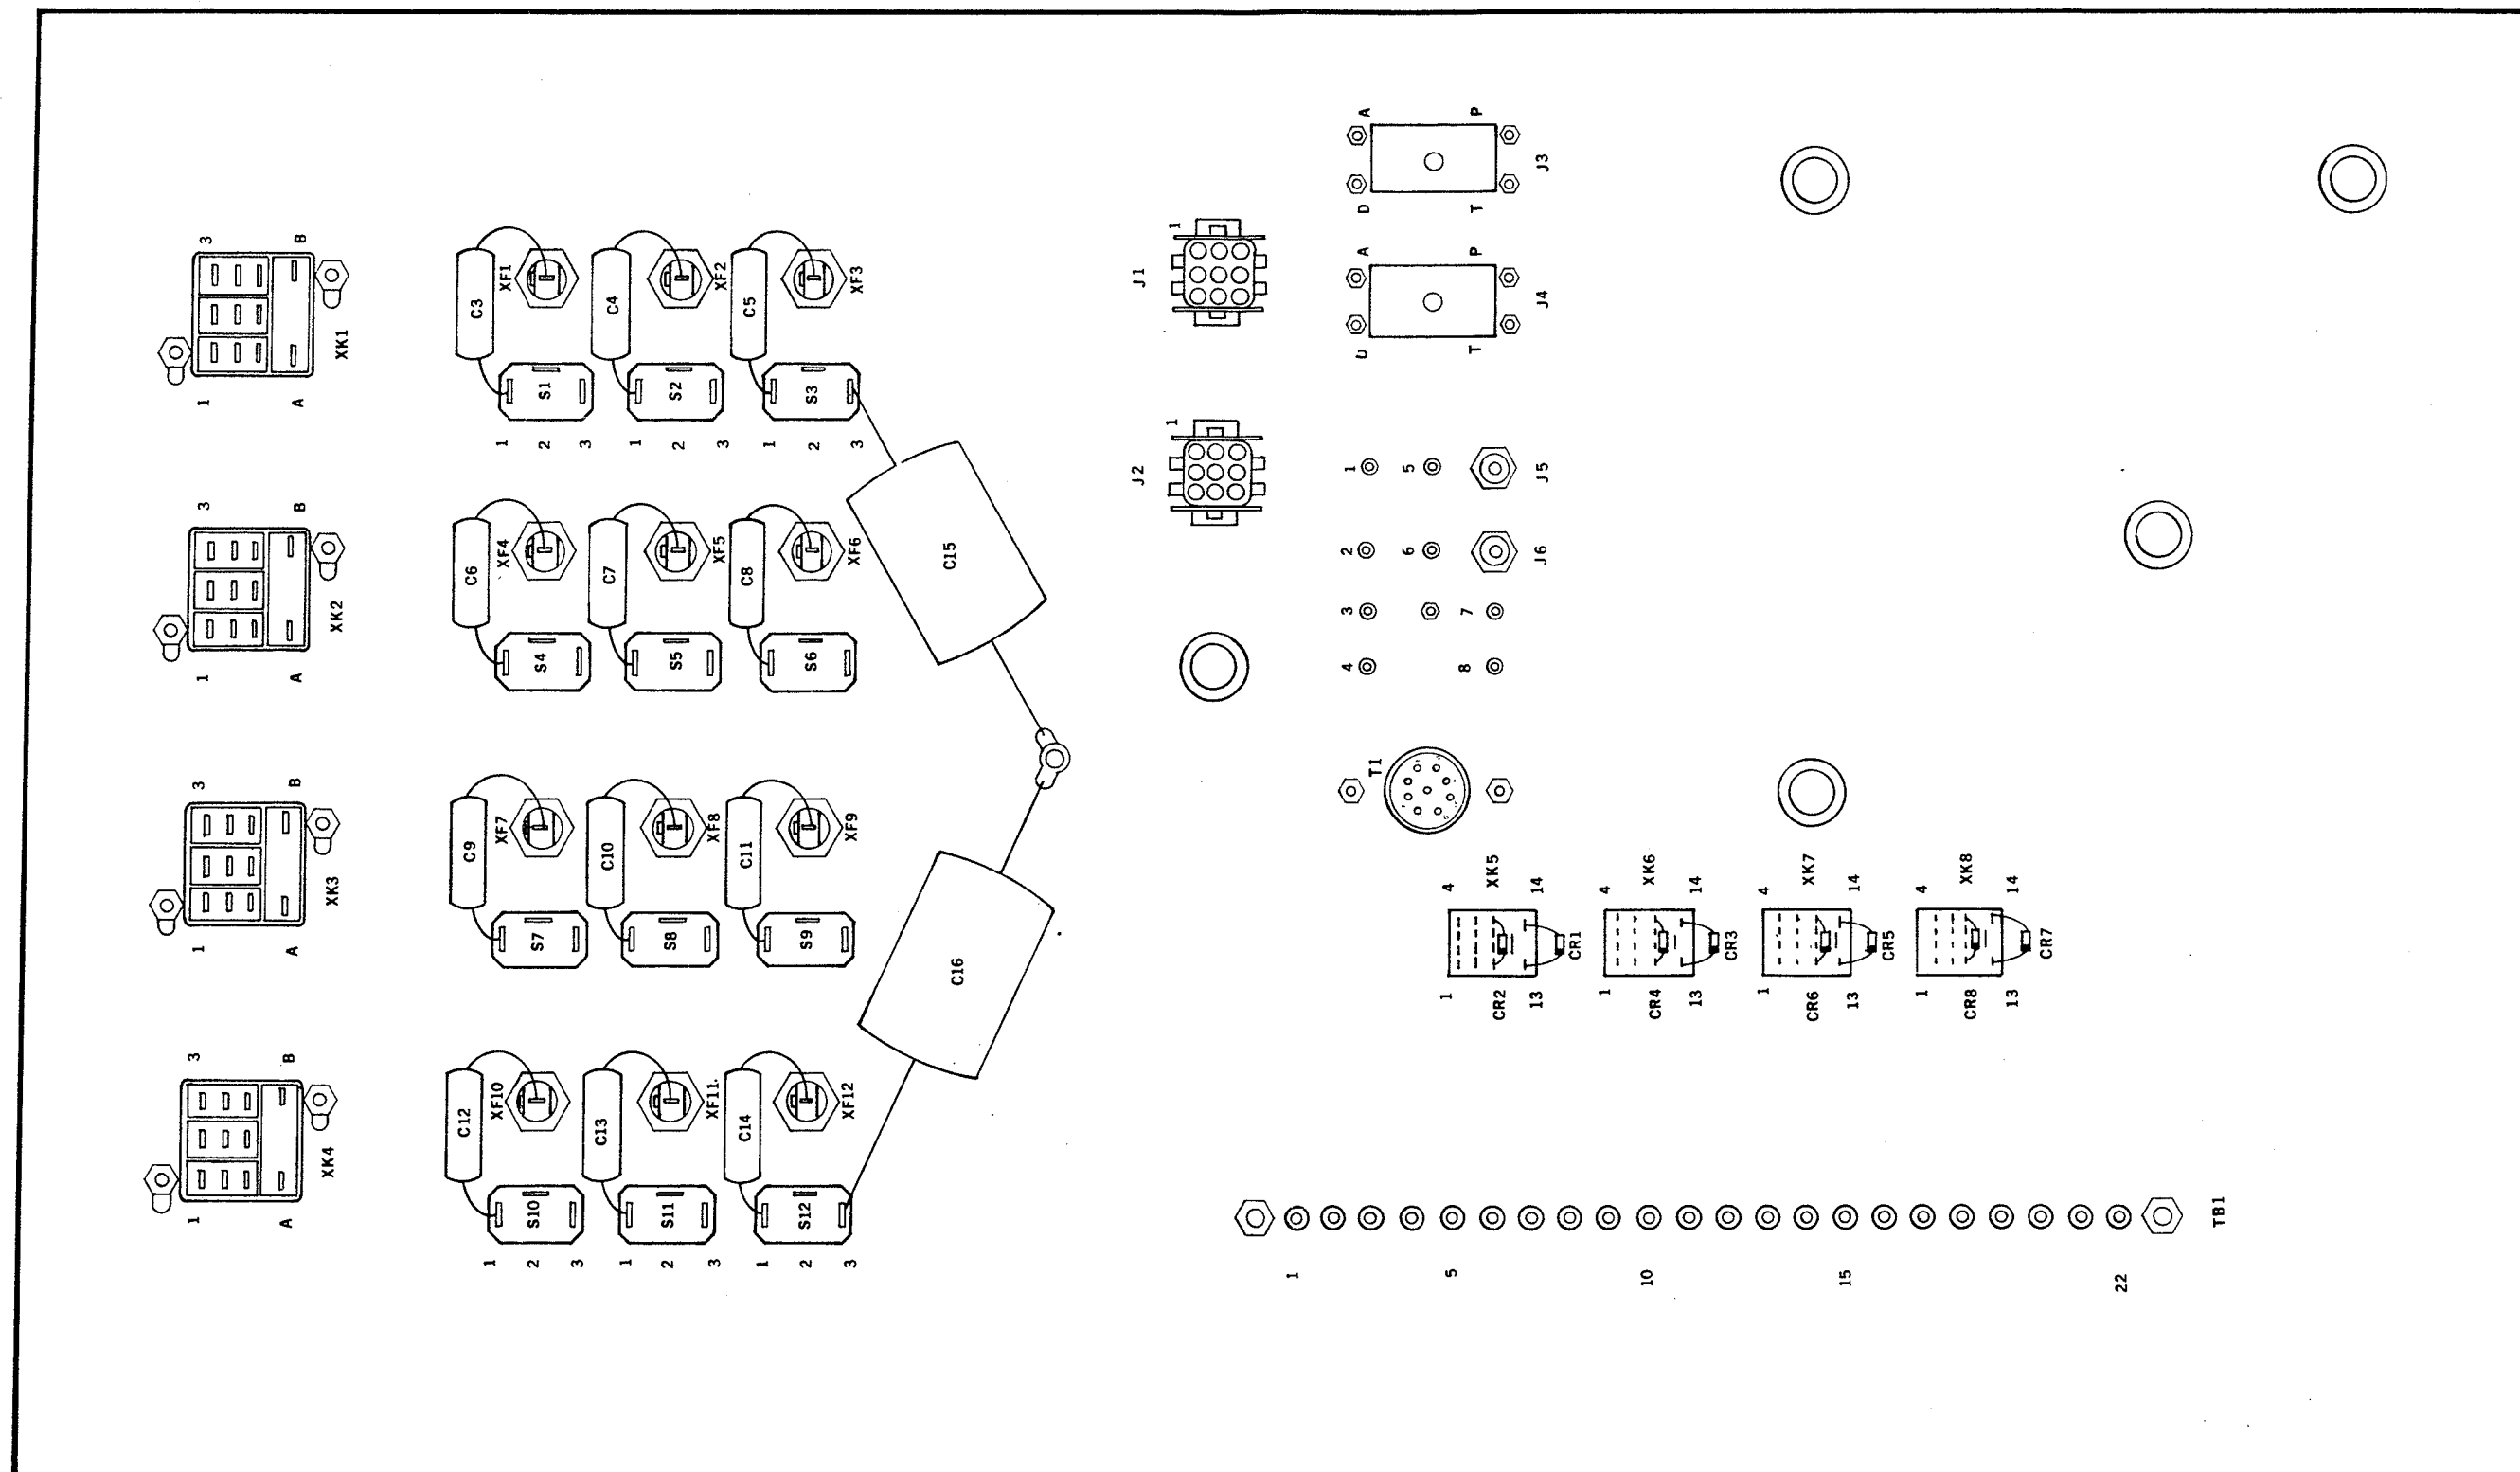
Assembly Detail - NAC29 Interface Panel (Rear View)
